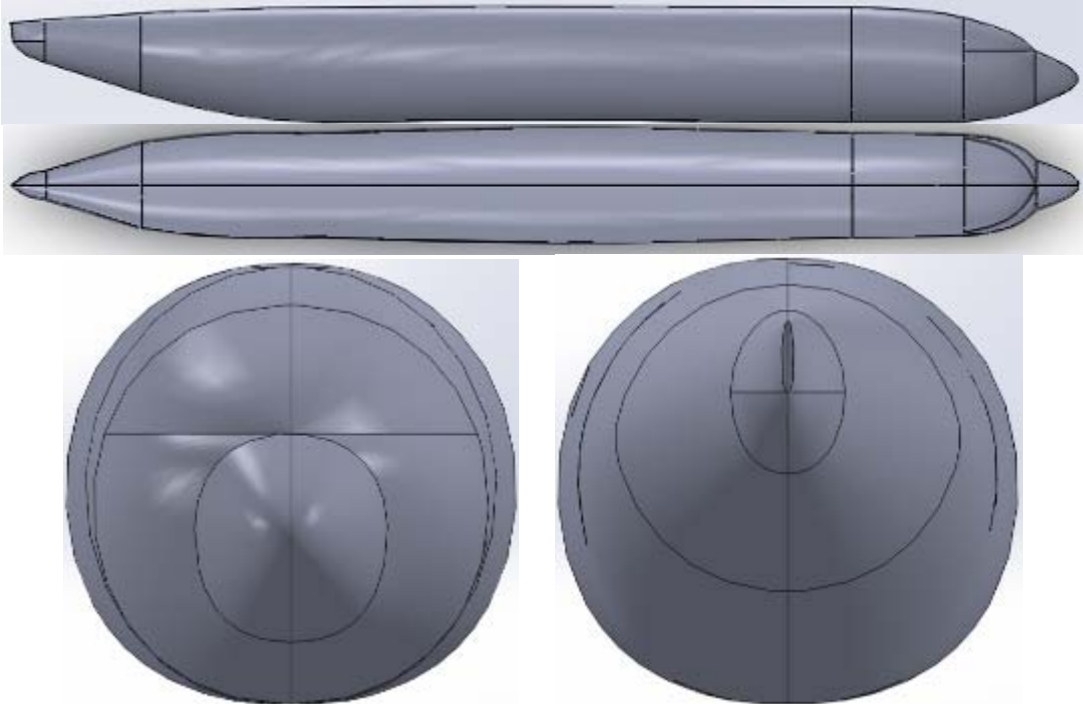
Side, Top, Front, and Rear views (top to bottom, left to right) of the Boeing 737-700 fuselage modeled in SolidWorks.
